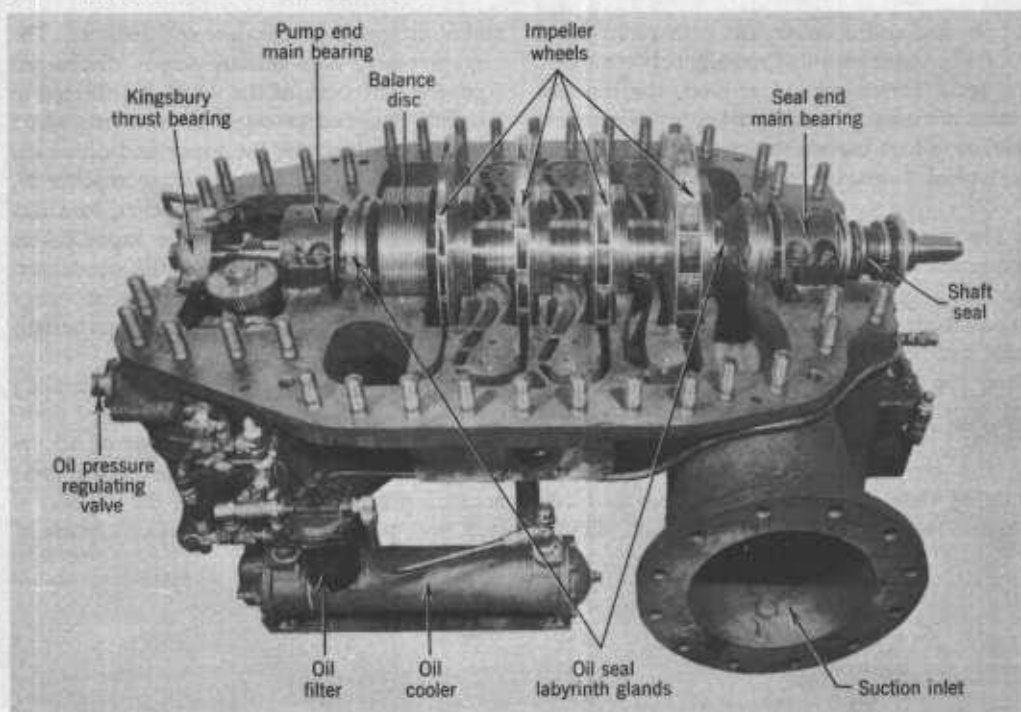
Four-stage centrifugal compressor with upper half of housing removed to show construction of details. (Courtesy York Corporation.)
